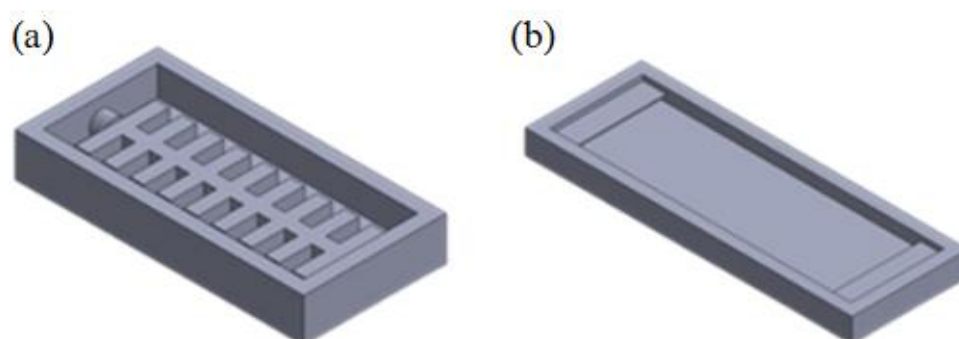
Mold for (a) side layers and (b) middle layer.
